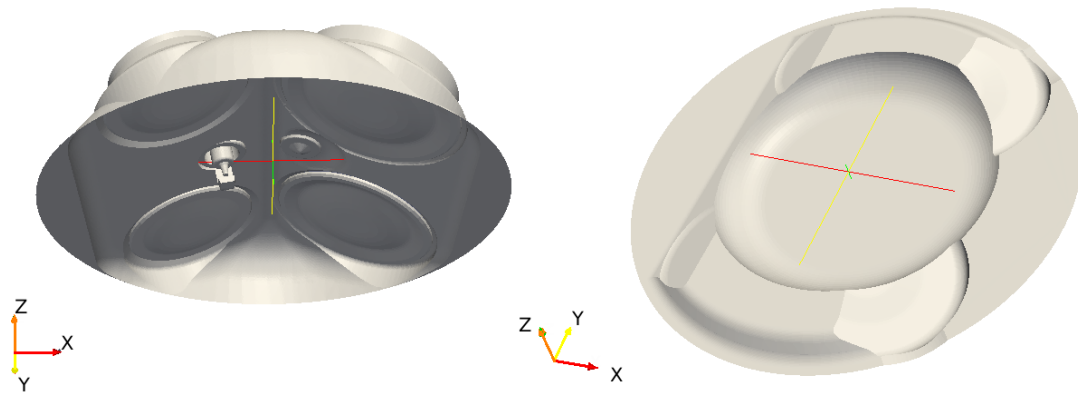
Views of the cylinder head (left) and the piston crown (right) of the Mahle Di3 engine.
